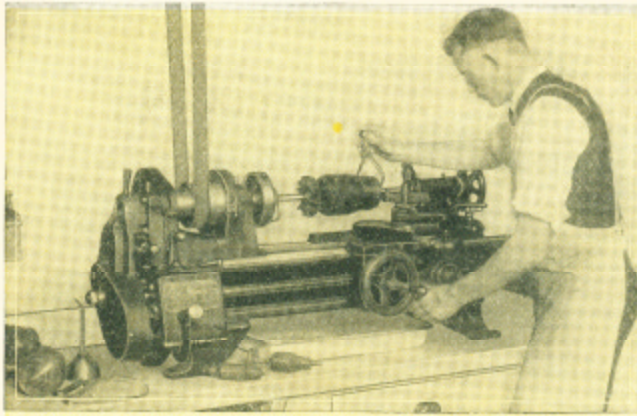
The Above Illustration Shows a 9-inch Quick Change Gear Bench Lathe in Operation. This Lathe Is Equipped with Quick Change Gear Box and Automatic Friction Feeds.
